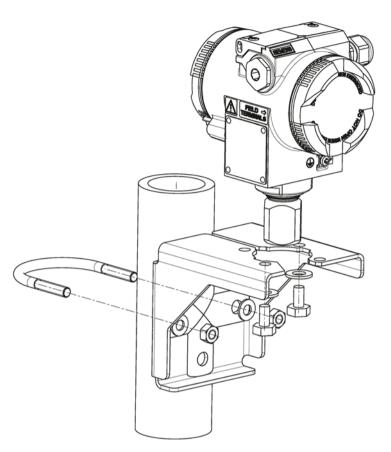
Fastening the pressure transmitter on the mounting bracket
